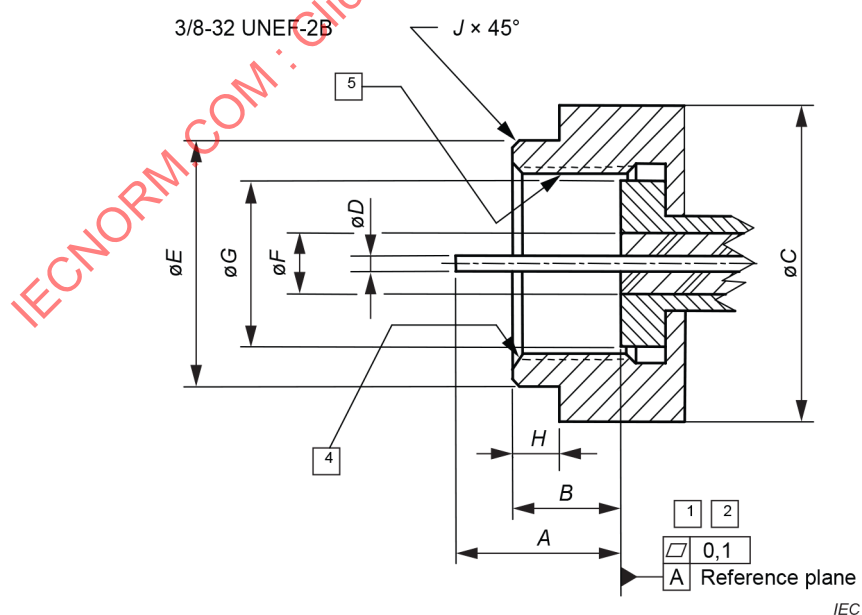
Outdoor “F” type male plug (for dimensions, see Table A.2)
